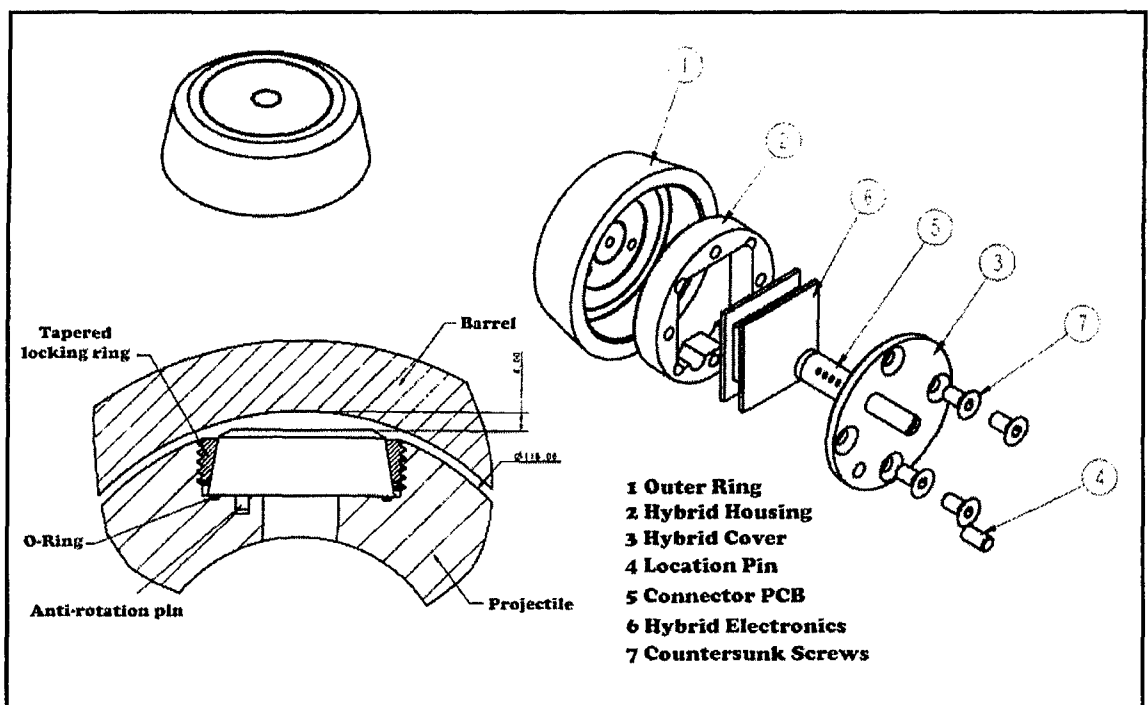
Exploded view of displacement transducer and detail of assembly into projectile.
